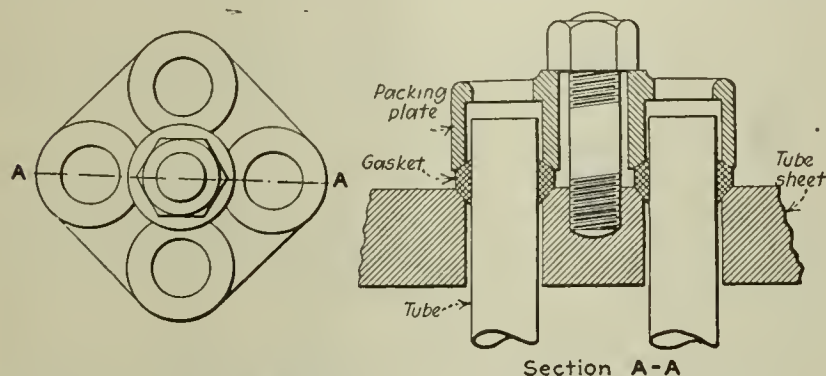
TUBE PACKING PLATE SHOWING METHOD OF SECURING TUBES
